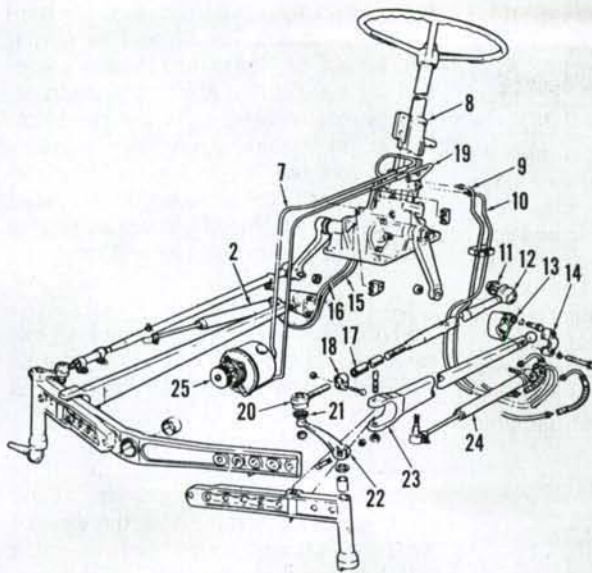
Drawing of power steering system on Models 2310, 2600, 2610, 3600, 3610, 4100 and 4110 without a cab. For exploded view of steering gear and valve assembly (8), refer to Fig. 6. Exploded view of power steering pump (25) is shown in Fig. 5.
